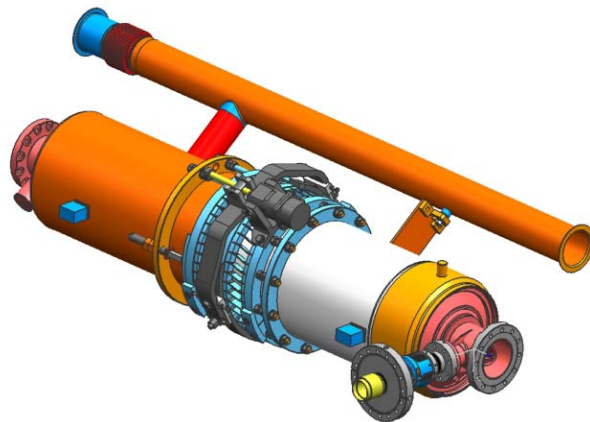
The cavity dressed with the modified helium tank and piezo blade tuner.
